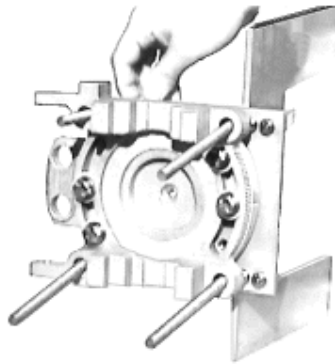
Inserting the Remaining Mounting Bracket Bolts
